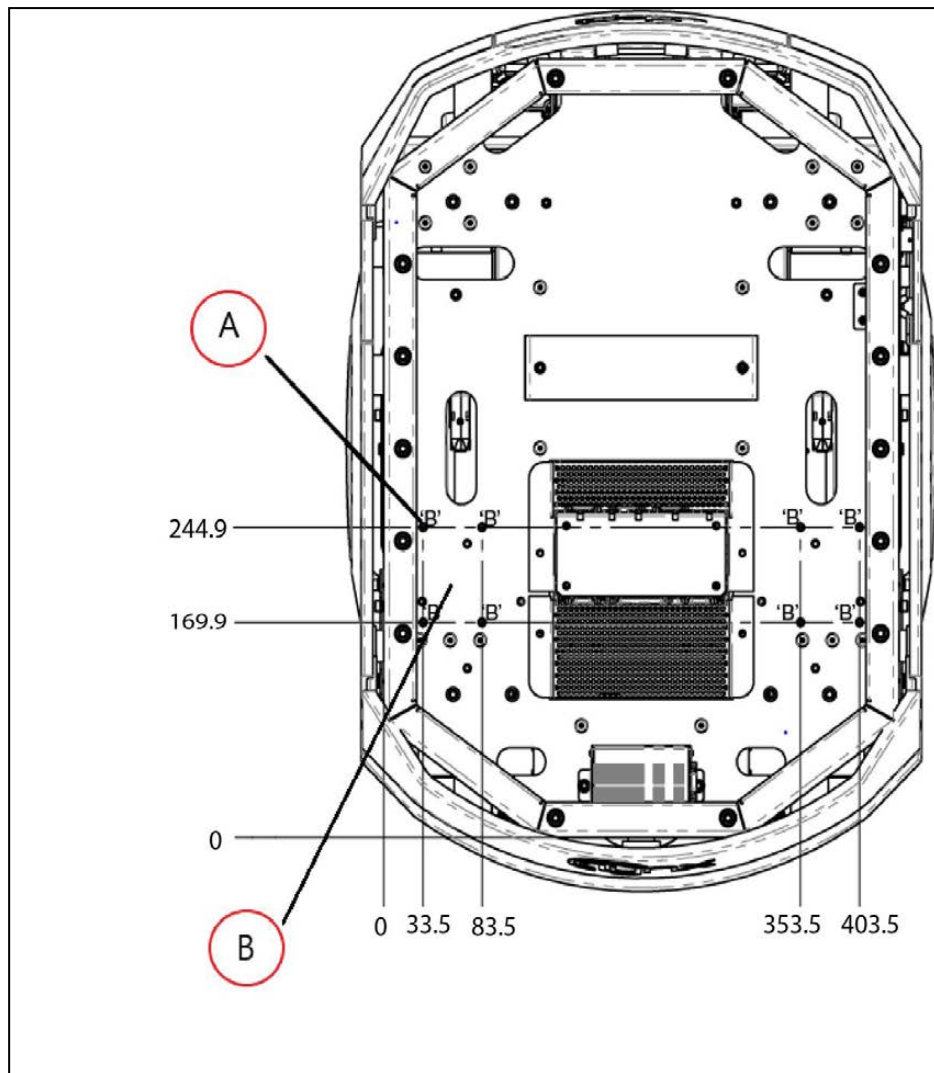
PlatformDeck Dimensions, with M5-threaded Holes (units are mm)
